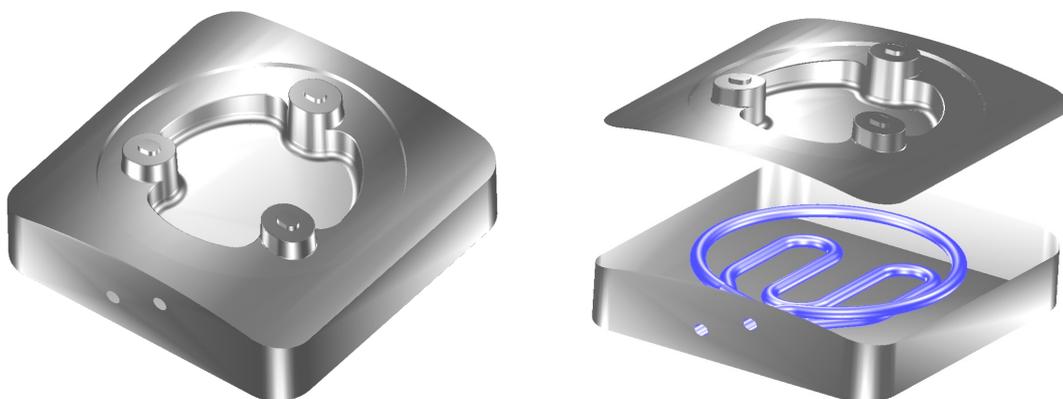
Left: injection molding tool insert, right: view of the internal cooling system
